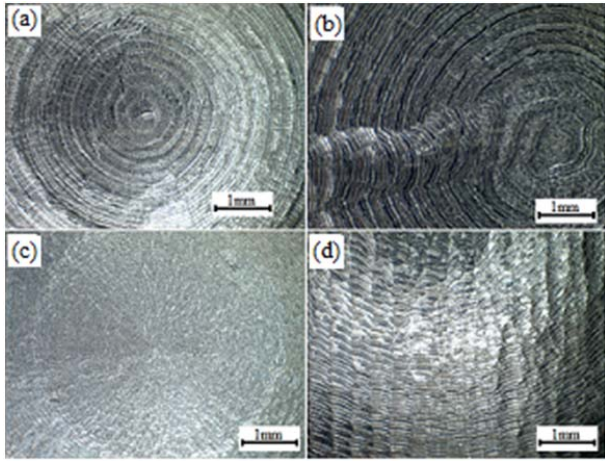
Machined surface and the effect of tool path on surface texture; (a) spiral outward, (b) spiral inward, (c) radial and (d) zig-zag at 25X magnification
